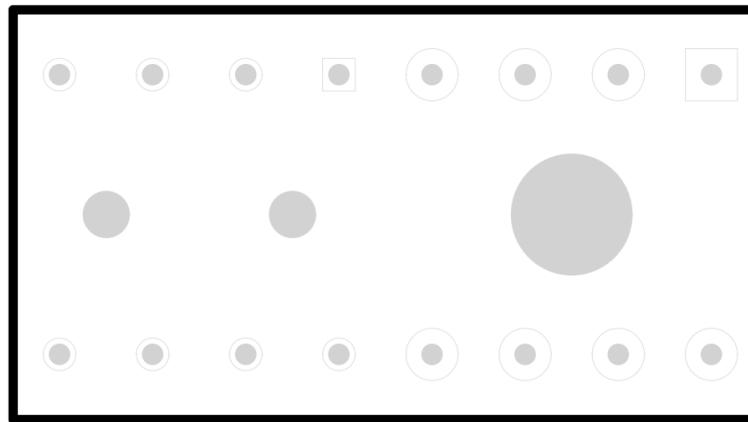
PCB Bottom-Layer Assembly Drawing
